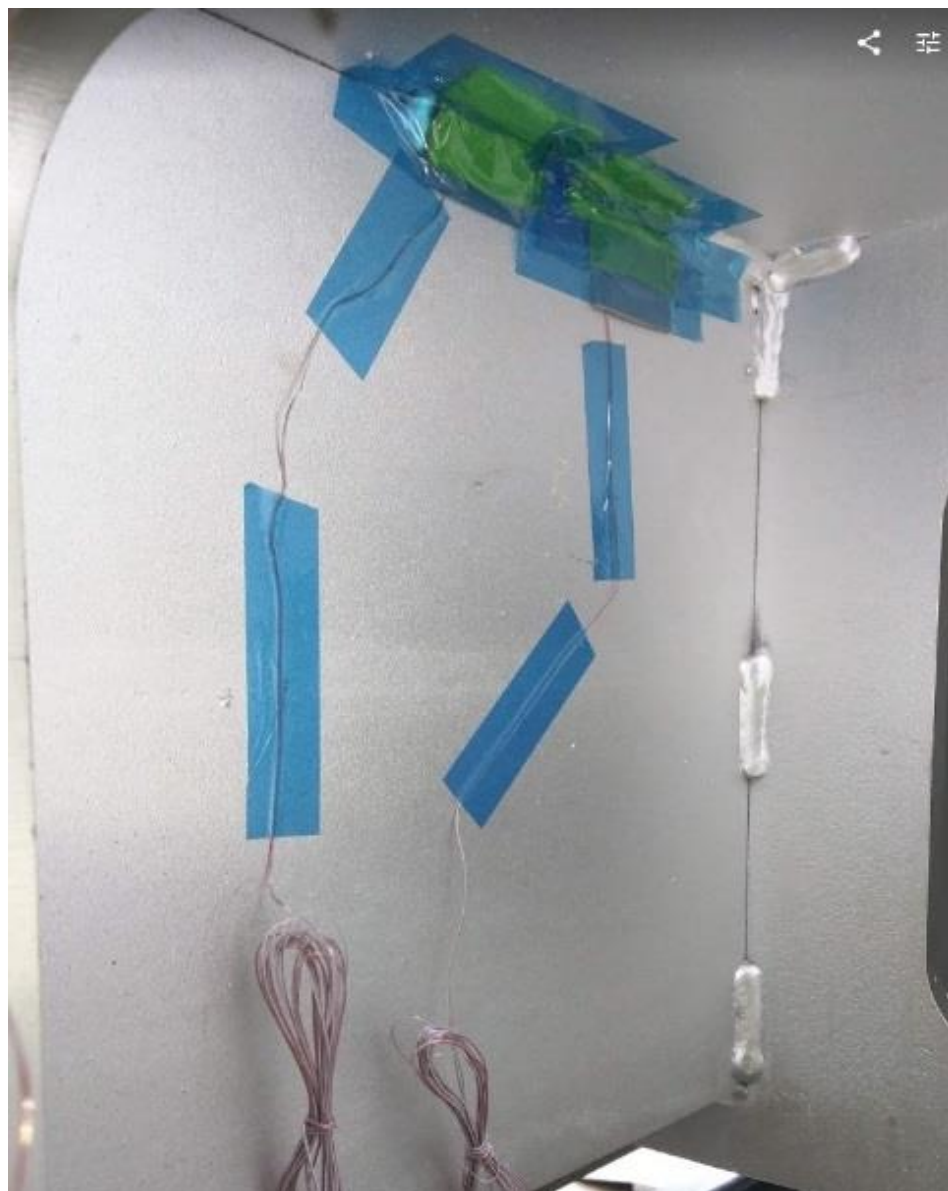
Placement of thermocouples underneath the tool face-sheets
